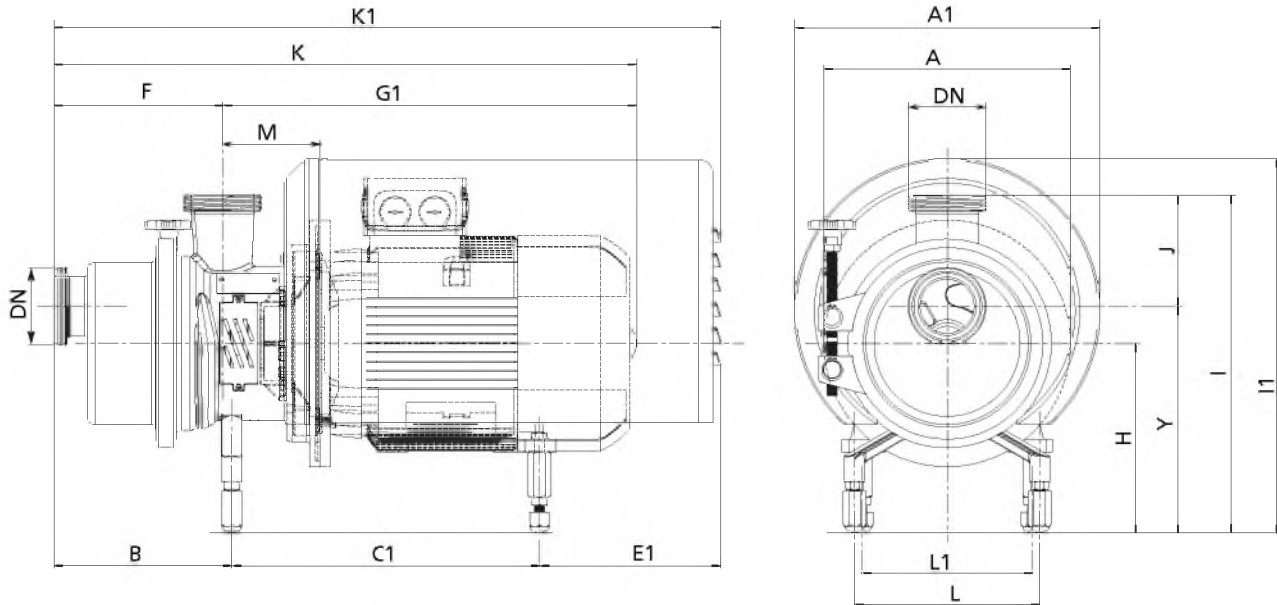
Pump set with motor shroud, with 4-point ball feet
